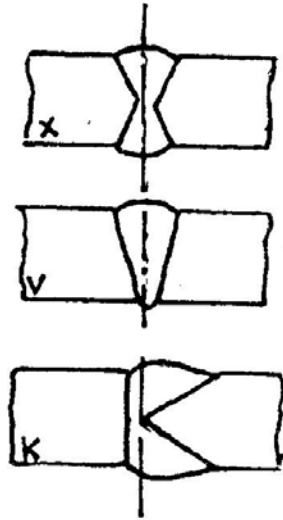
The joints which are made by "X", "V", "K" type weld grooves
